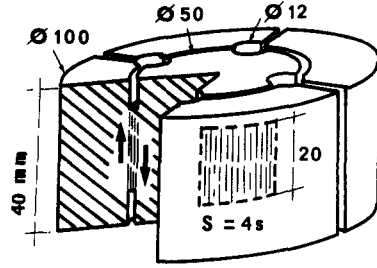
Optimized dimensions of the proposed direct shear test specimen.
